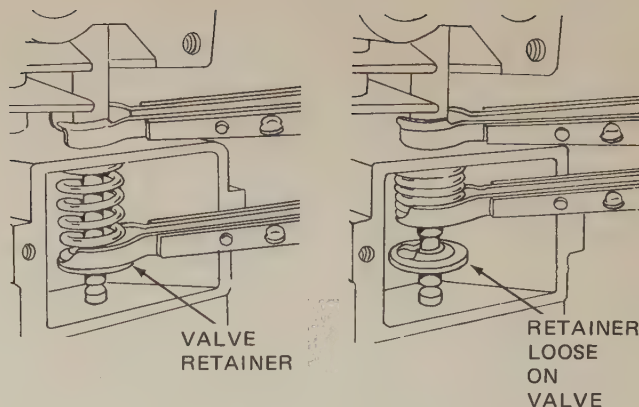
Removing valve spring on engine using one-piece retainer. (Briggs & Stratton Corporation)
